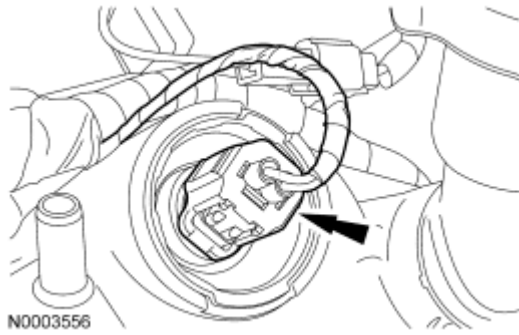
Locating Camshaft Timing (VCT) Solenoid Electrical Connectors
